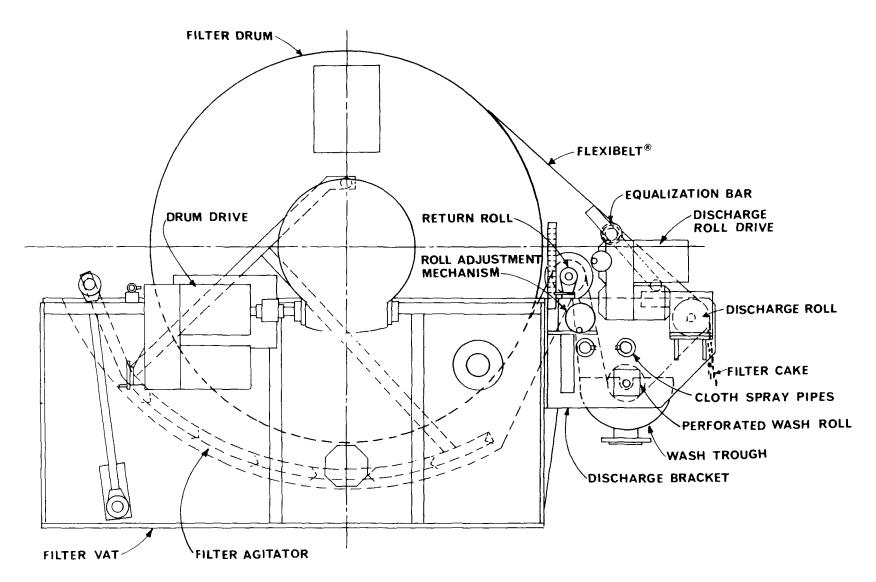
Schematic diagram of a belt type vacuum filter (courtesy of Komline-Sanderson Engineering Corporation)
